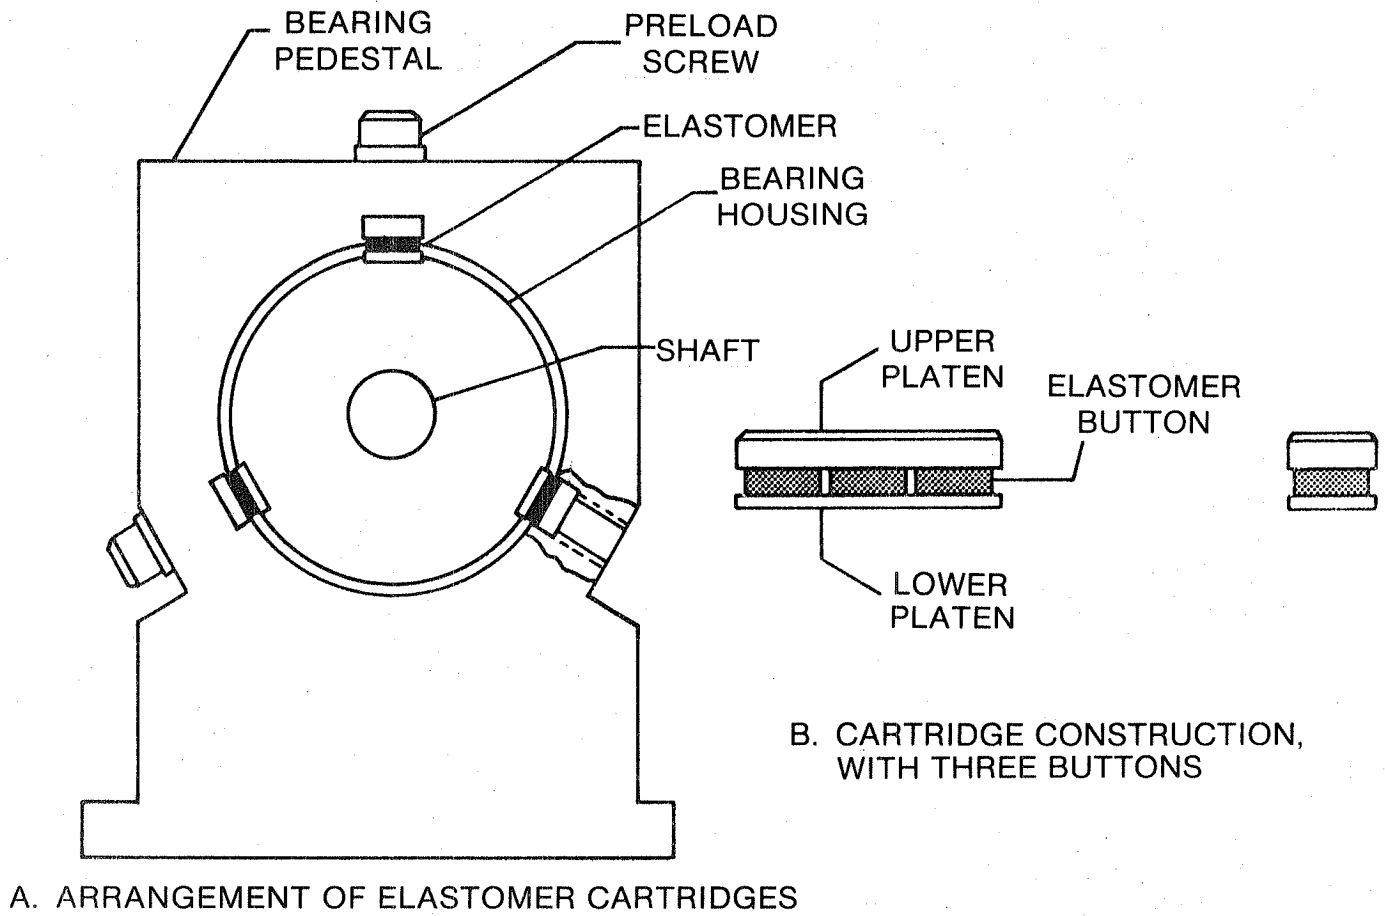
Method of Supporting Test Rig Rotor on Elastomers
